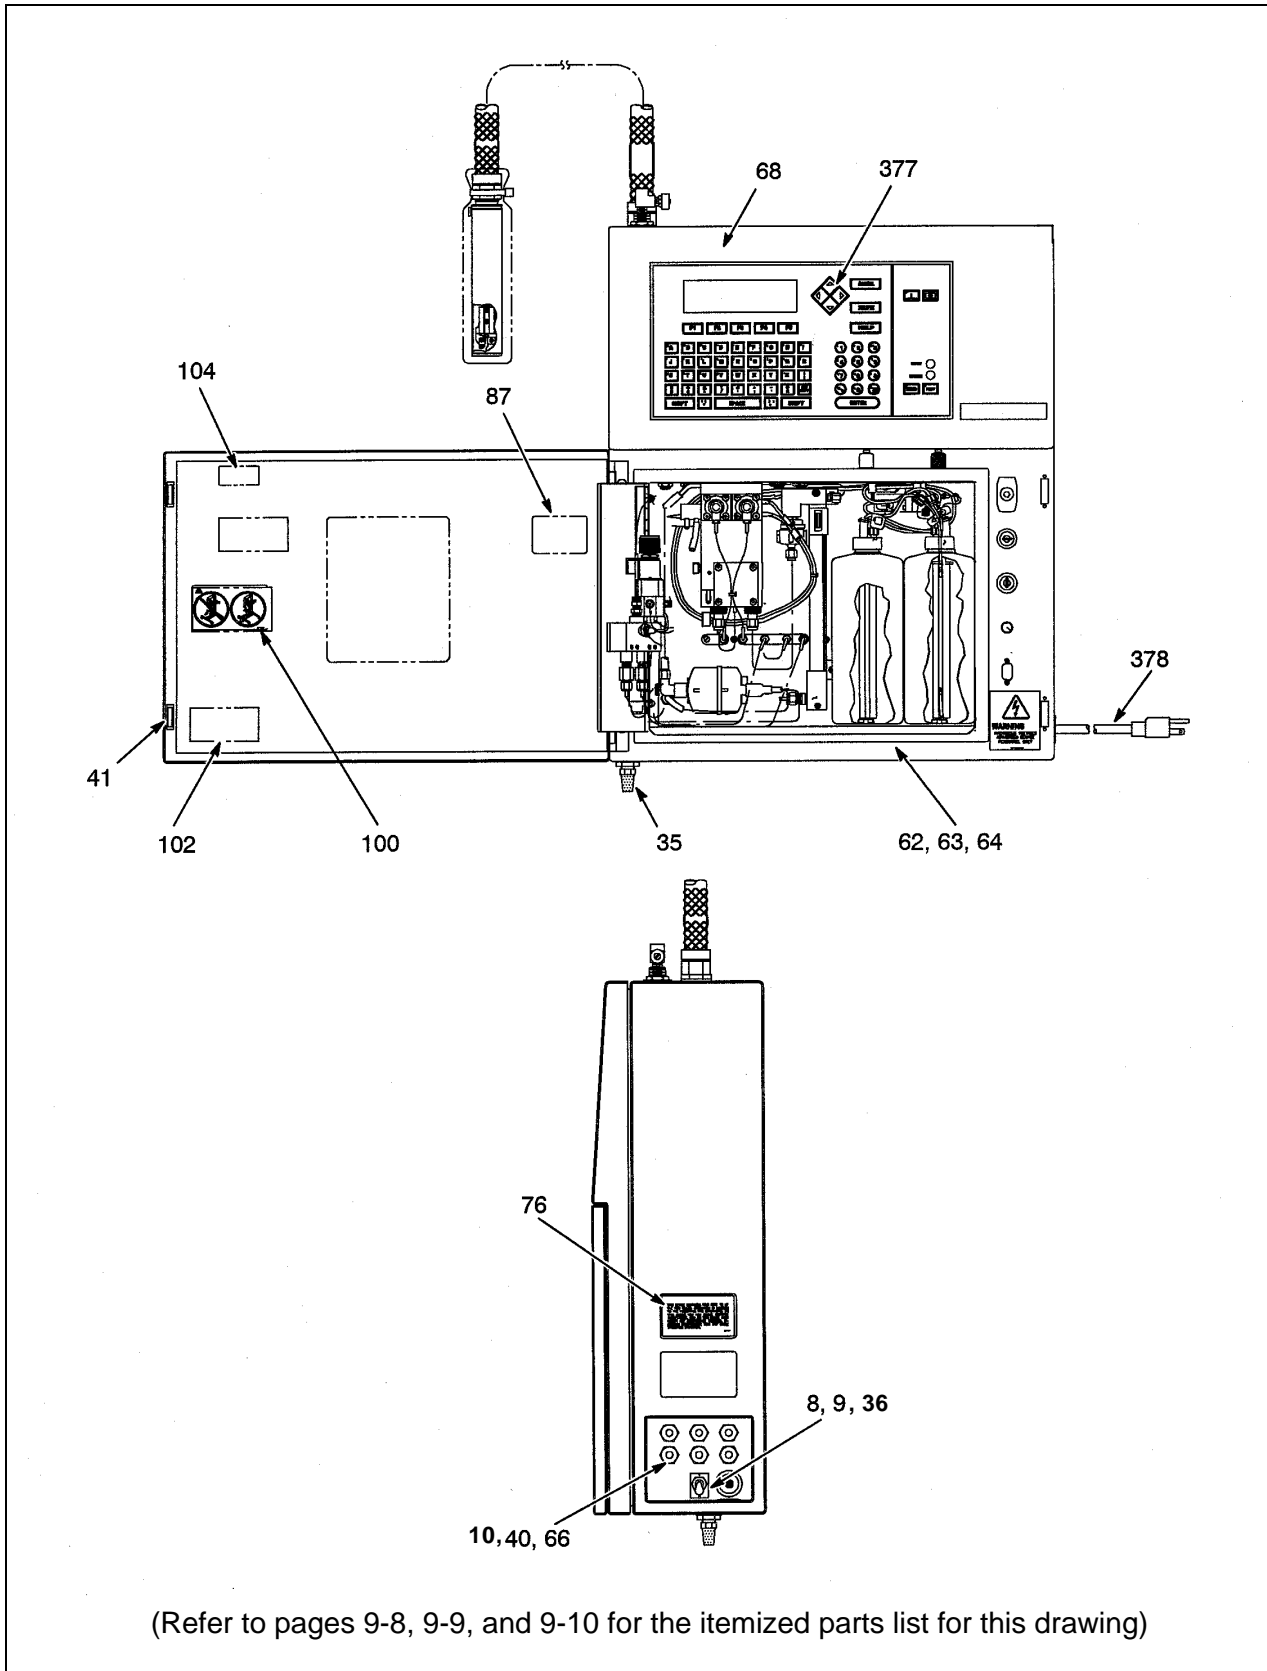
Generic EXCEL® Printer, Sheet 1
